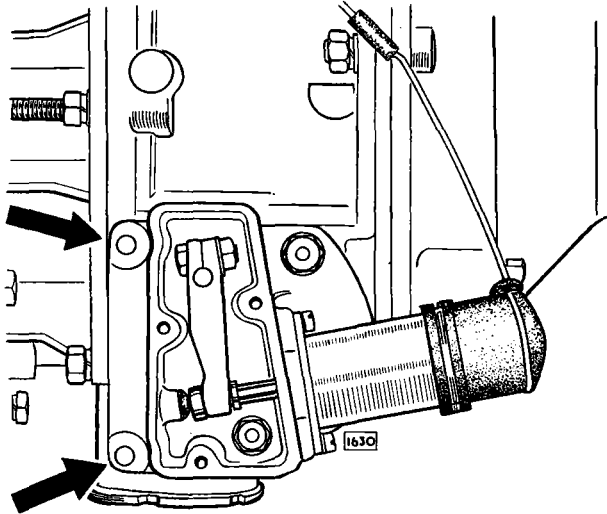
Removing the solenoid bracket—remove the nuts from the studs before unscrewing the two setscrews.
